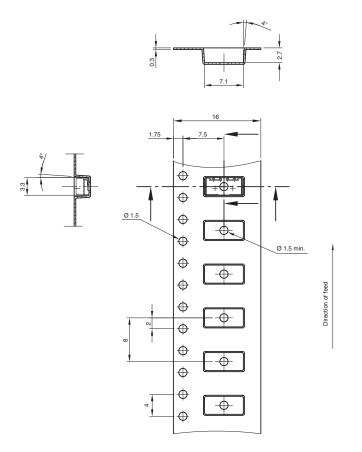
Issue: 1: 23.03.09 21785
